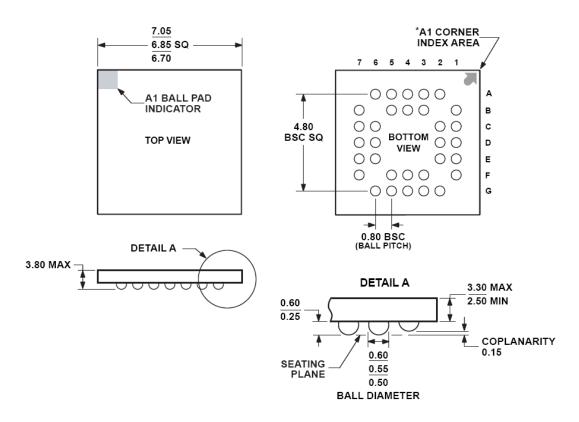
32-Lead Chip Scale Ball Grid Array [CSPBGA] (BC-32) Dimensions shown in millimeters
